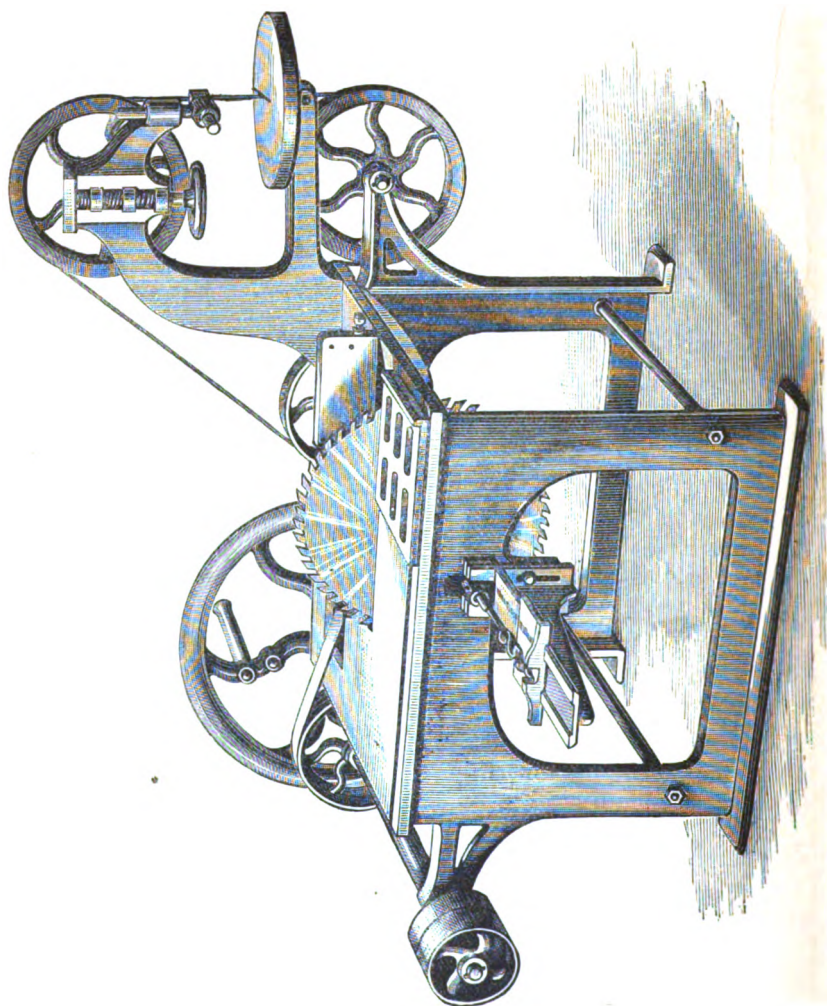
HAND OR STEAM POWER SAW BENCH AND BAND SAWING MACHINE COMBINED.
